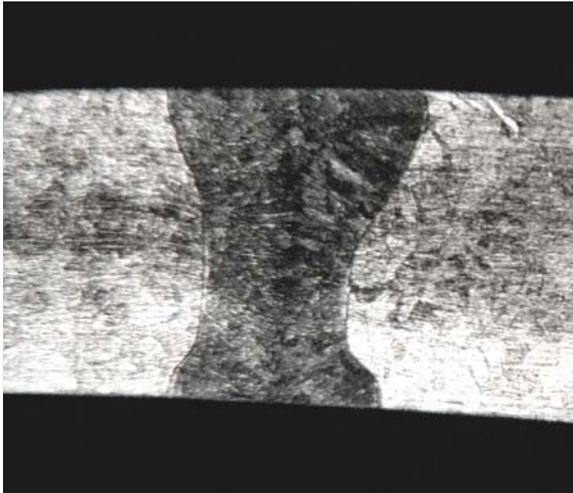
TIG Stainless Steel Tube Weld Pattern
